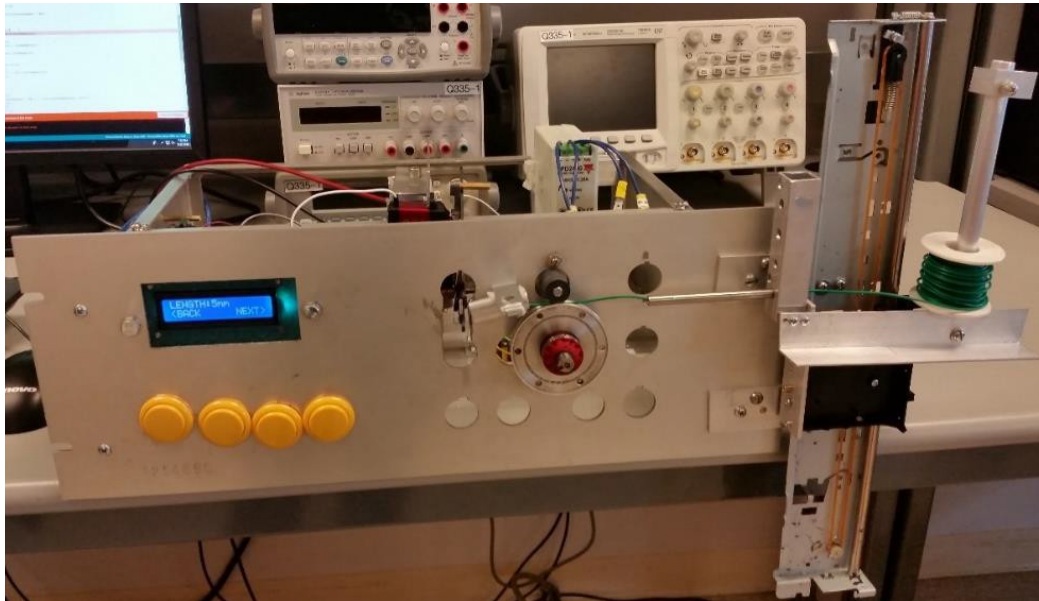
Industrial wire cutting machine with original sliding mechanism.
